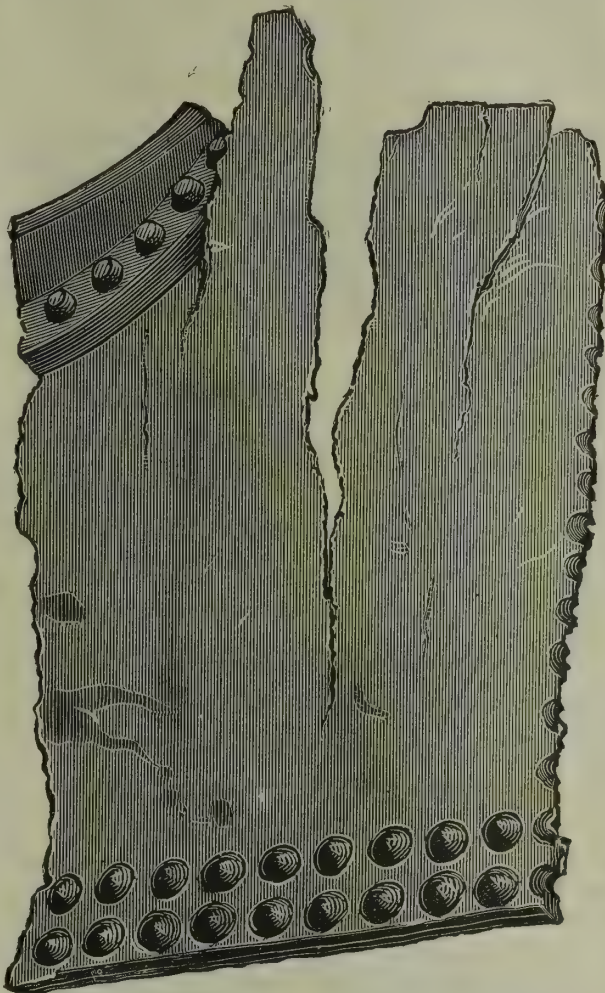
Part of the middle course of plates, boiler No. 3, showing broken man-hole frame which struck and fractured No. 2, splitting itself. Also showing at BB parts of the tapped hole through which the drip pipe entered the boiler, as shown at B, Fig. 1.
